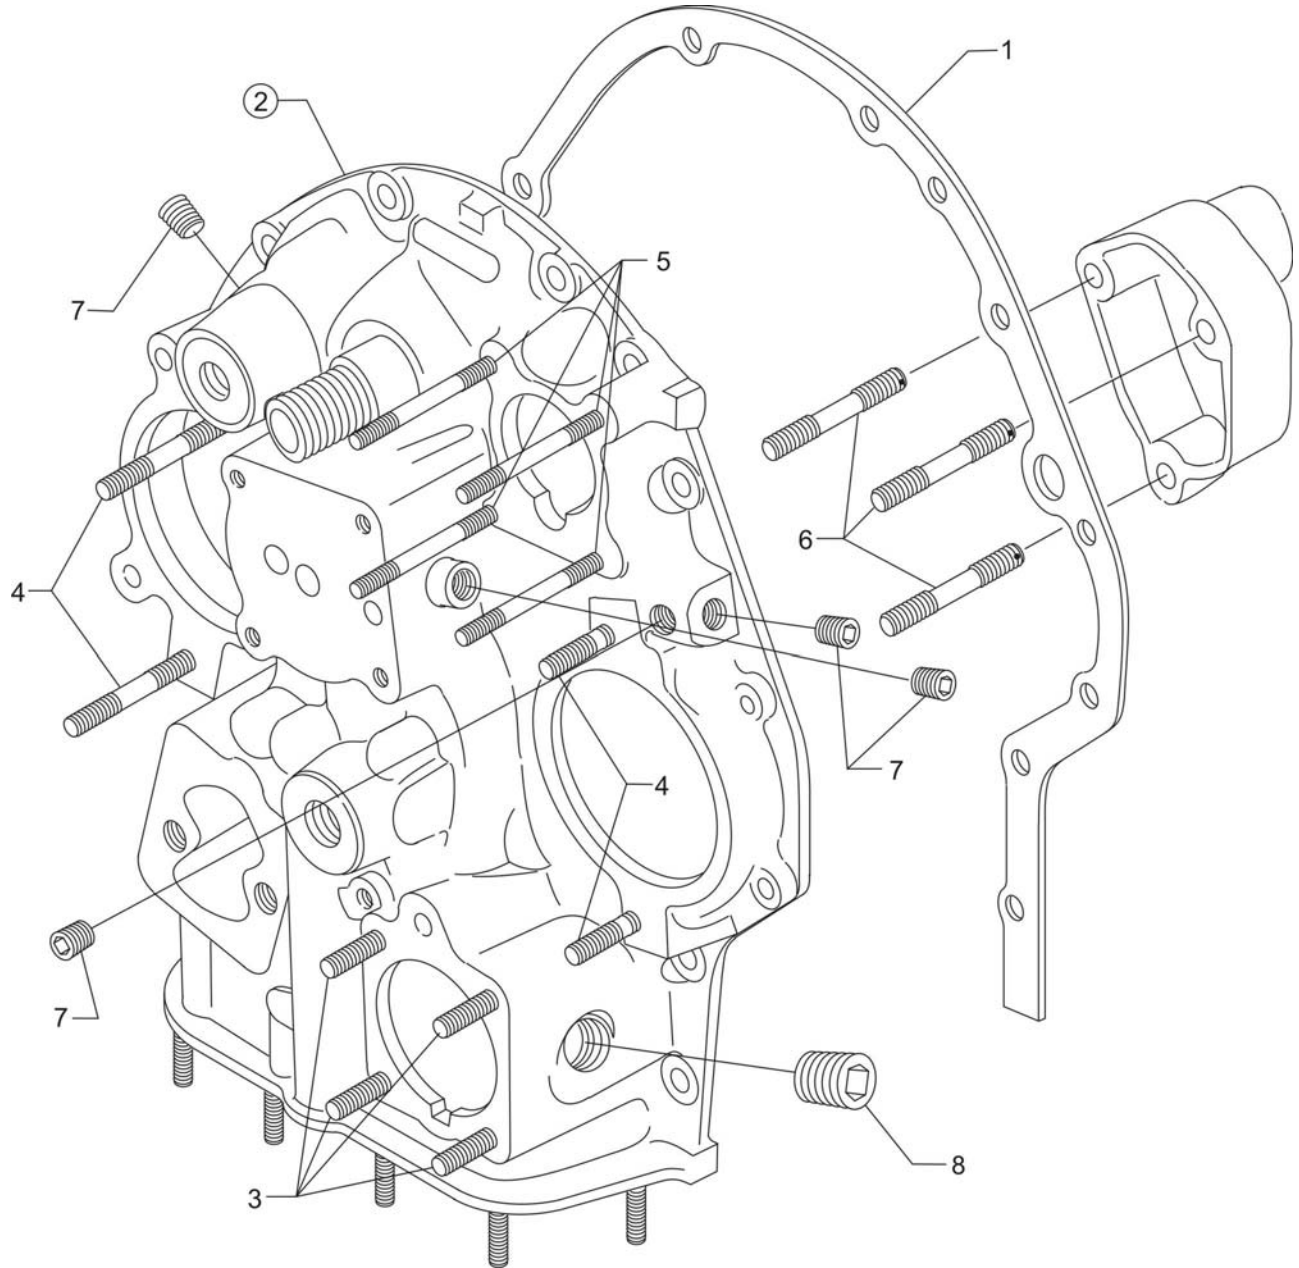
ACCESSORY HOUSING ASSEMBLY
